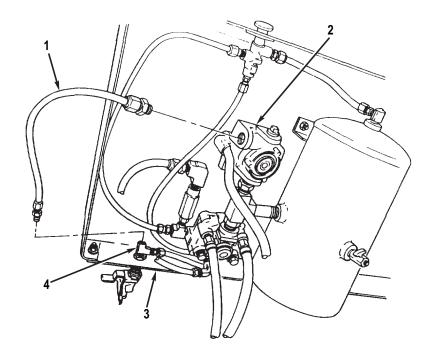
Booster Relay Valve-to-Right Side Tee Tube Assembly Replacement.
